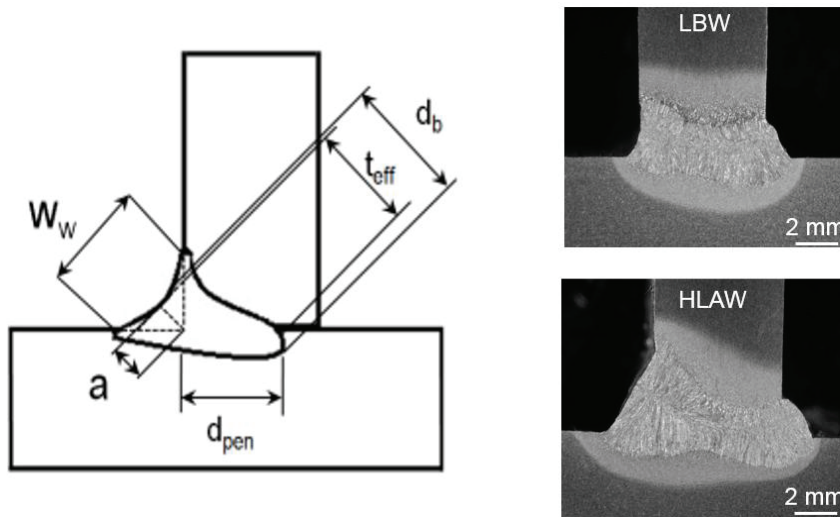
Weld geometry dimensions (left) and typical macro-sections of laser (upper) and hybrid (lower) welded joints performed from one side in a single pass.
